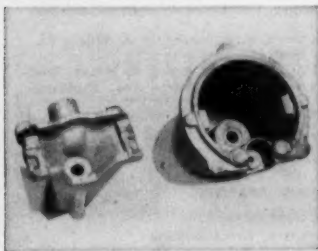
These low-chromium iron castings, which are parts for a die-casting machine, are machinable, uniformly hard, and resistant to the effect of high temperature.
